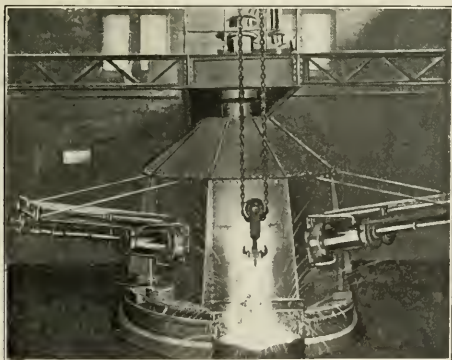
CASTING WITH A ROTARY FURNACE OF 1000 HP.
